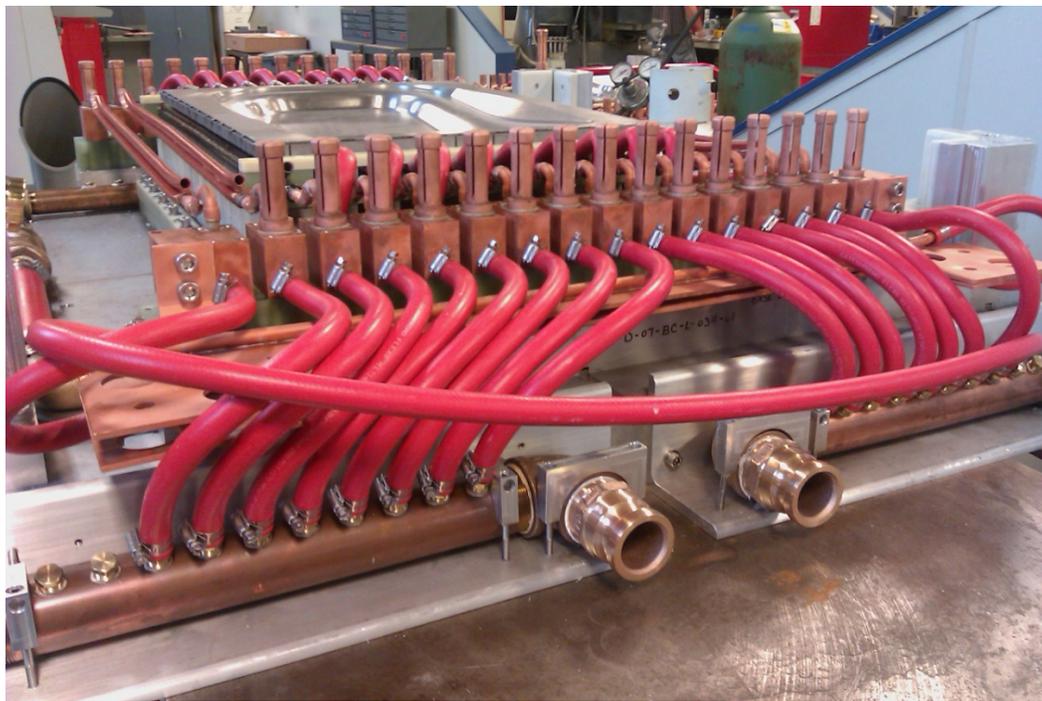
Side view of the completed lower tool half showing the quick disconnect for the cooling water feeding each of the induction coil turns
